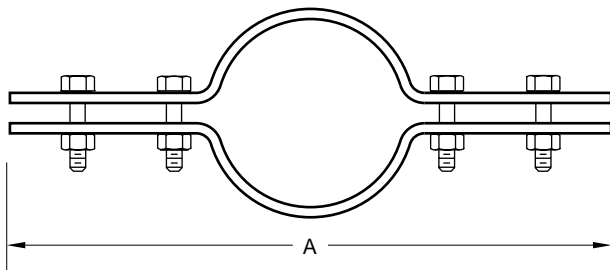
DB – UNDERGROUND PIPE CLAMP
